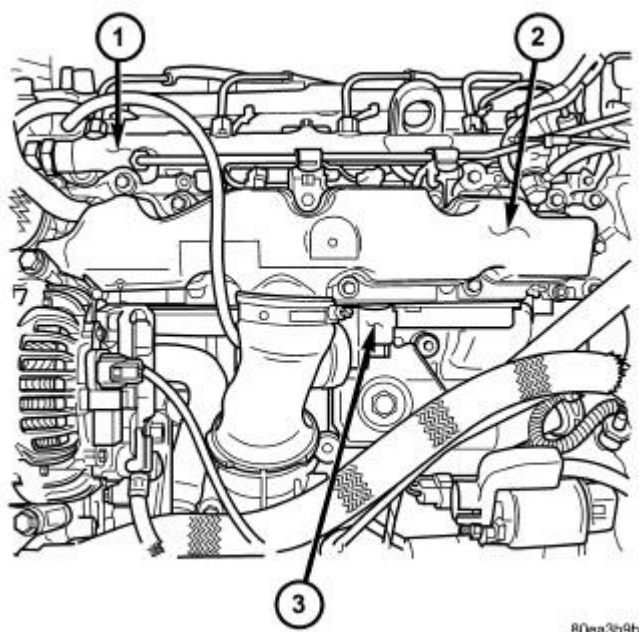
INTAKE MANIFOLD SWIRL VALVE LOCATION
